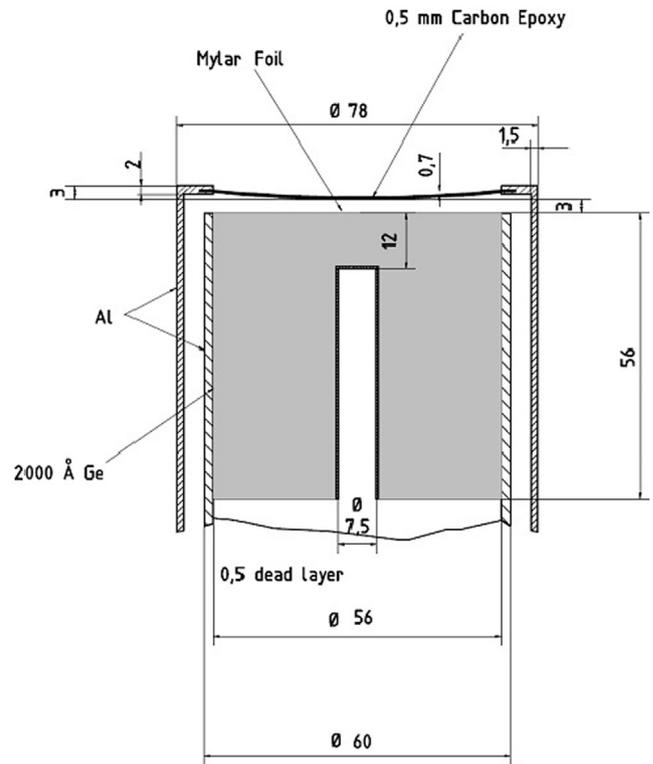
Cross-section of the detector with the dimensions and materials provided by the manufacturers.
